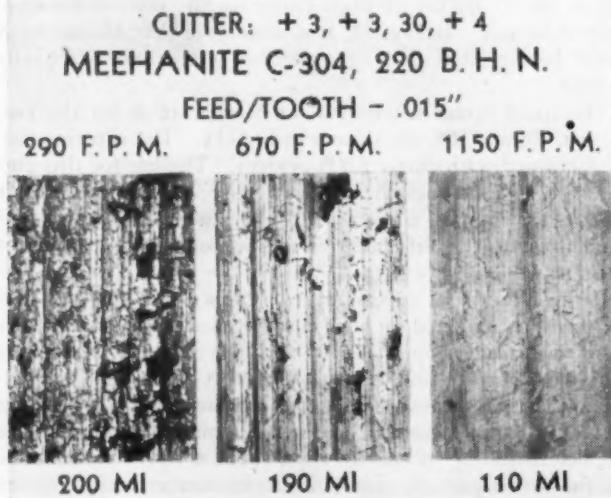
QUALITY OF SURFACE FINISH OBTAINED WITH SINGLE-TOOTH CUTTERS
